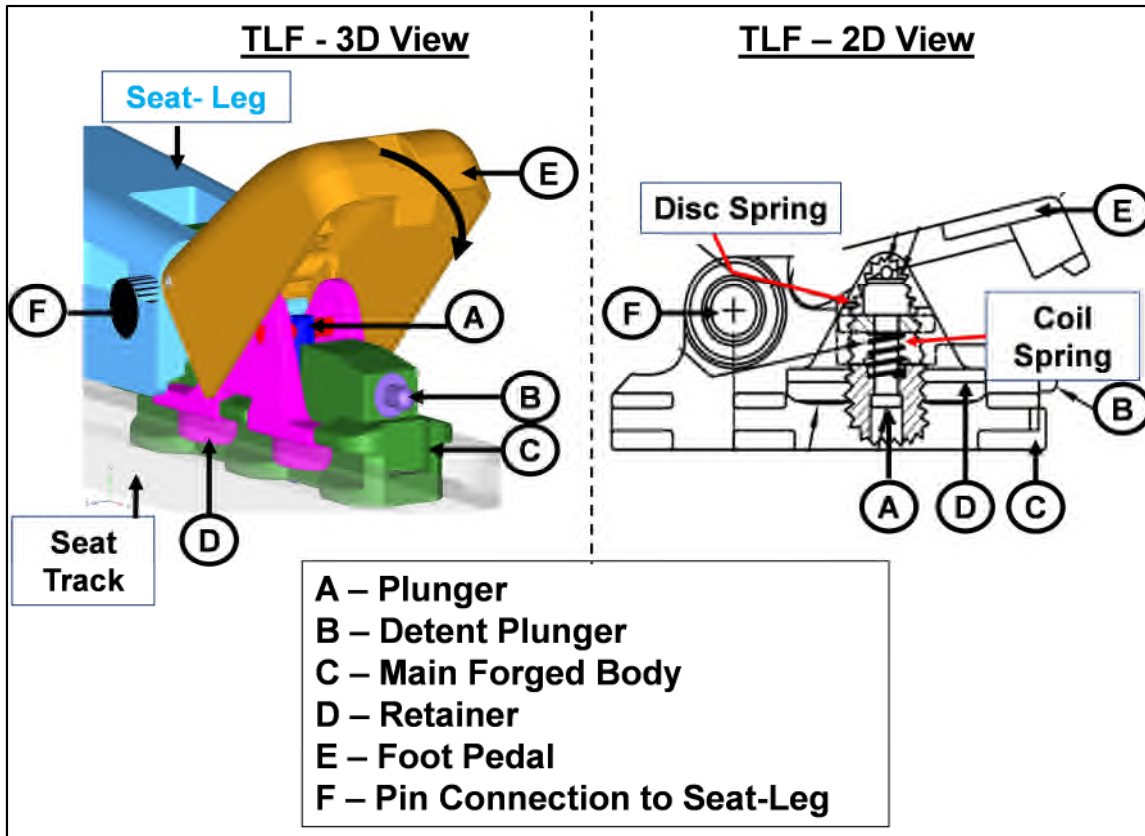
LHS – 3D View of Ankra Tool Less Fittings (TLF) used to fasten ‘Sleep Seat’ to the Seat-track (before assembly). RHS - Ankra rear tool less-fitting (part Number 49623). TLF consists of main forged body, C with three integrated studs engaging with Seat-track lips. Retainer, D has two shear plungers and the entire assembly is held together with two springs (disc and coil). Pressing of Foot-pedal E presses Plunger A, against Seat-track. Foot-pedal is held in position by detent plunger B, when assembled. Courtesy – BlueSky Designers Limited, UK
